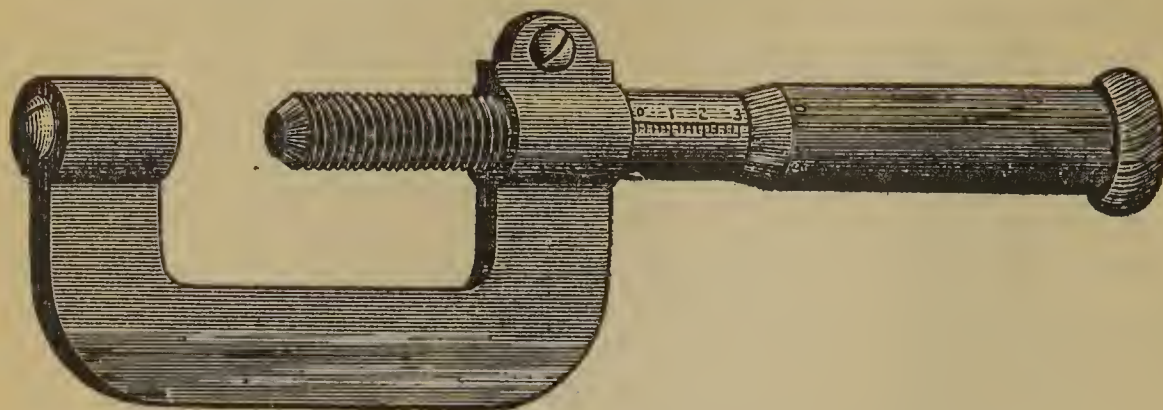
Micrometer Calipers for measuring Lead Plugs.
